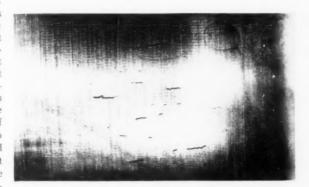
Surface checks in forged bar indicated by magnetic inspection.
